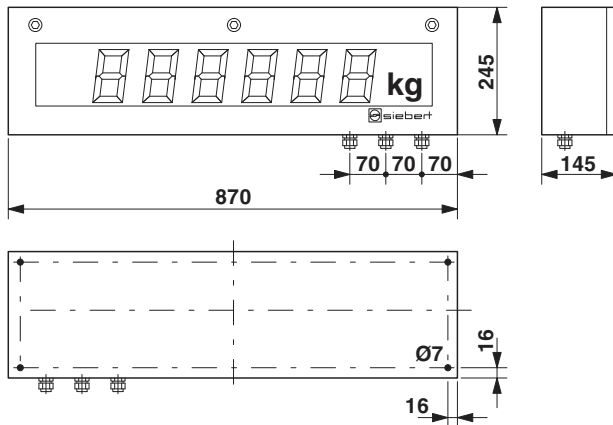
Dimensions of display S302 ... (dimensions in mm)
